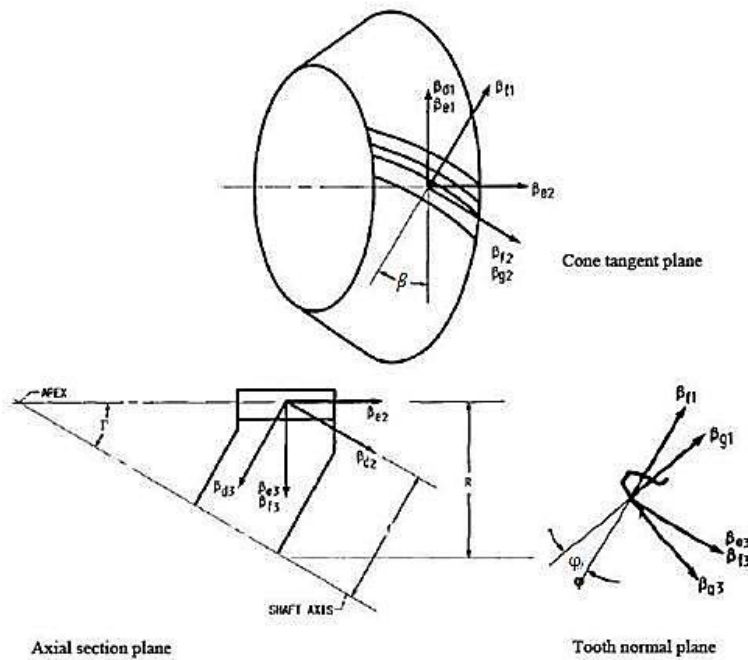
Spiral bevel gear tooth coordinates (M. Savage and P.C. Altidis, 1989)
